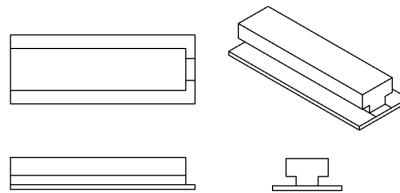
Sketch of Wall Mount Track (front, top, right, isometric)
